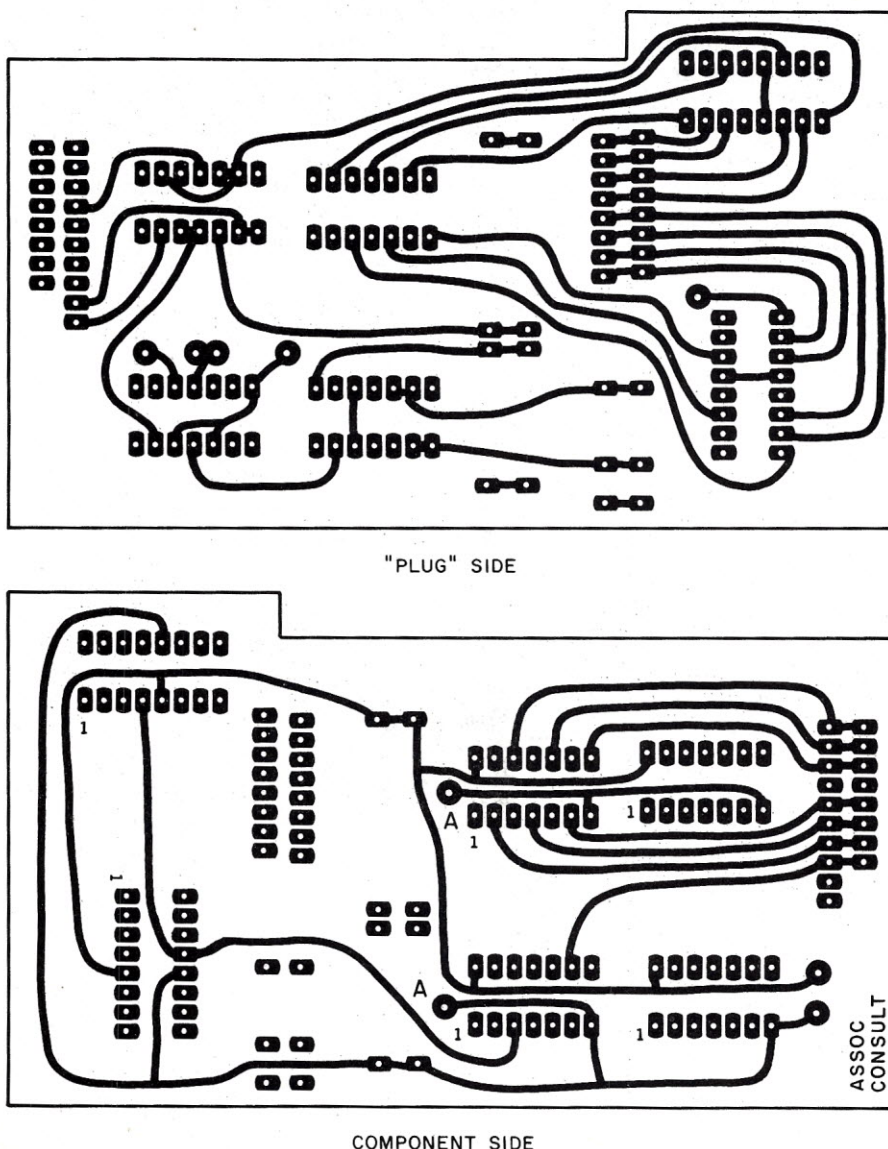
Adapter board—drilling and etching patterns. An insulated jumper wire must be installed connecting points A-A'.
